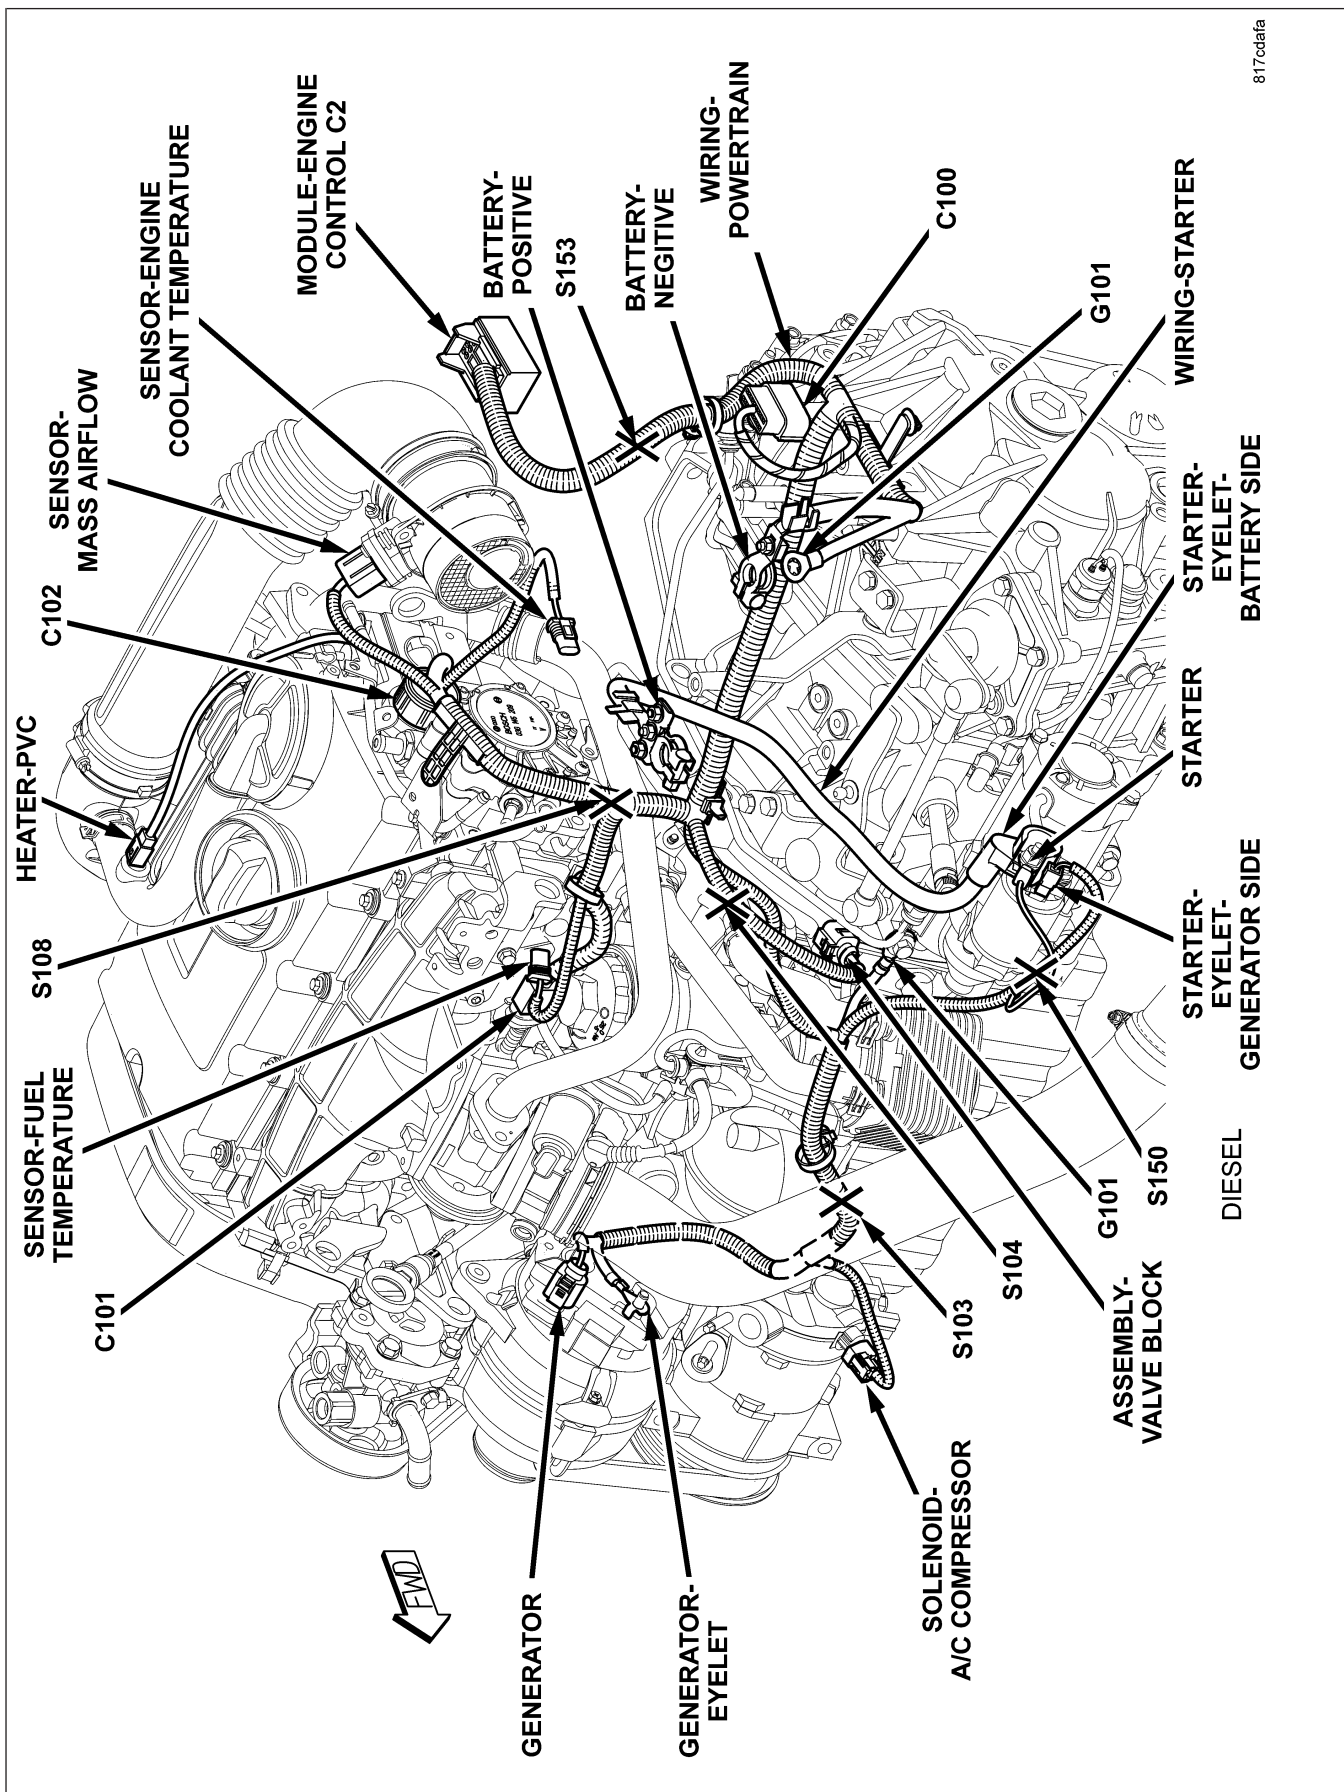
ENGINE - LEFT FRONT (DIESEL)
